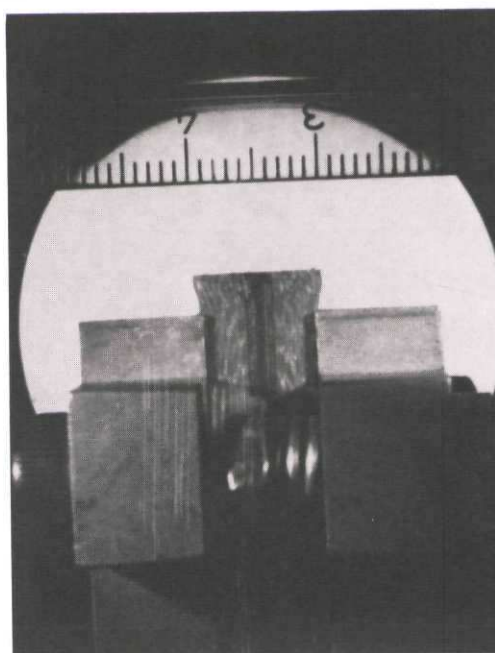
Brooming of Specimen Outside the ASTM D 695 Support Jig
